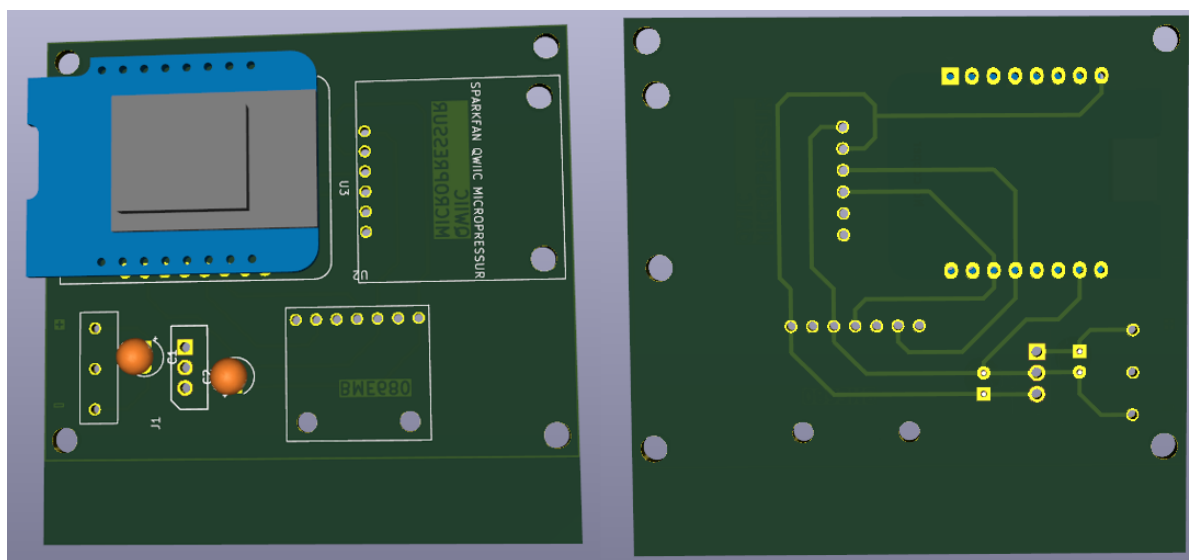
Samples of the PCB's for the sensors' prototypes
